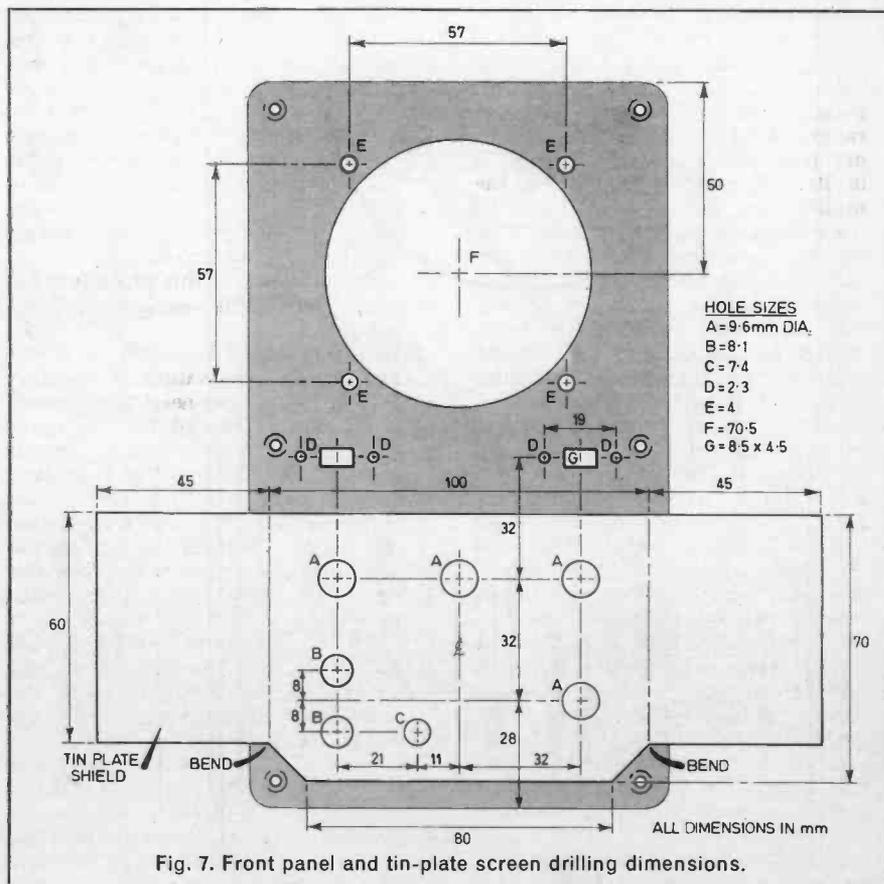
Front panel and tin-plate screen drilling dimensions.
